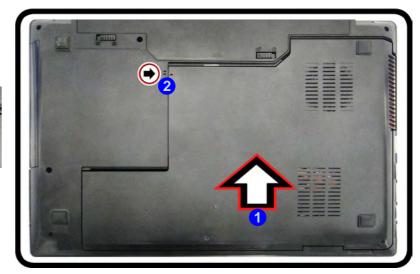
3 Removing the Component Bay Cover (Model B)
